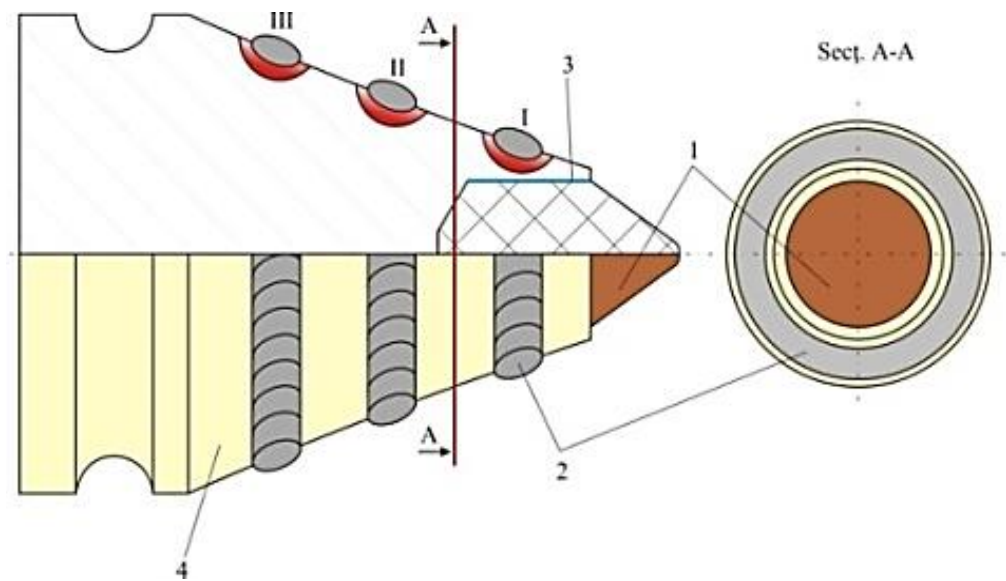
Concept of welding cord deposition on the frustoconical section of the tooth: (1) tungsten carbide tip; (2) annular cords achieved by metal deposition; (3) tungsten carbide tip brazing area in the front hole; (4) frustoconical section of the milling cutter tooth; zone I—first cordon; zone II—third cordon; zone III—second cordon.
